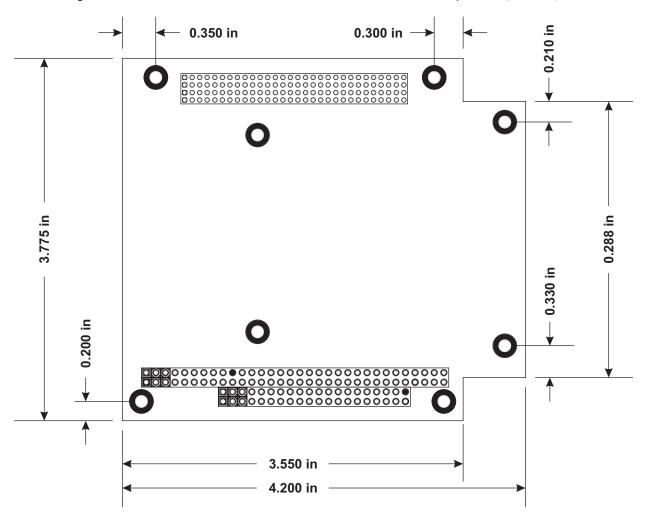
CM17109ER Physical Dimensions (±0.005 inches)
